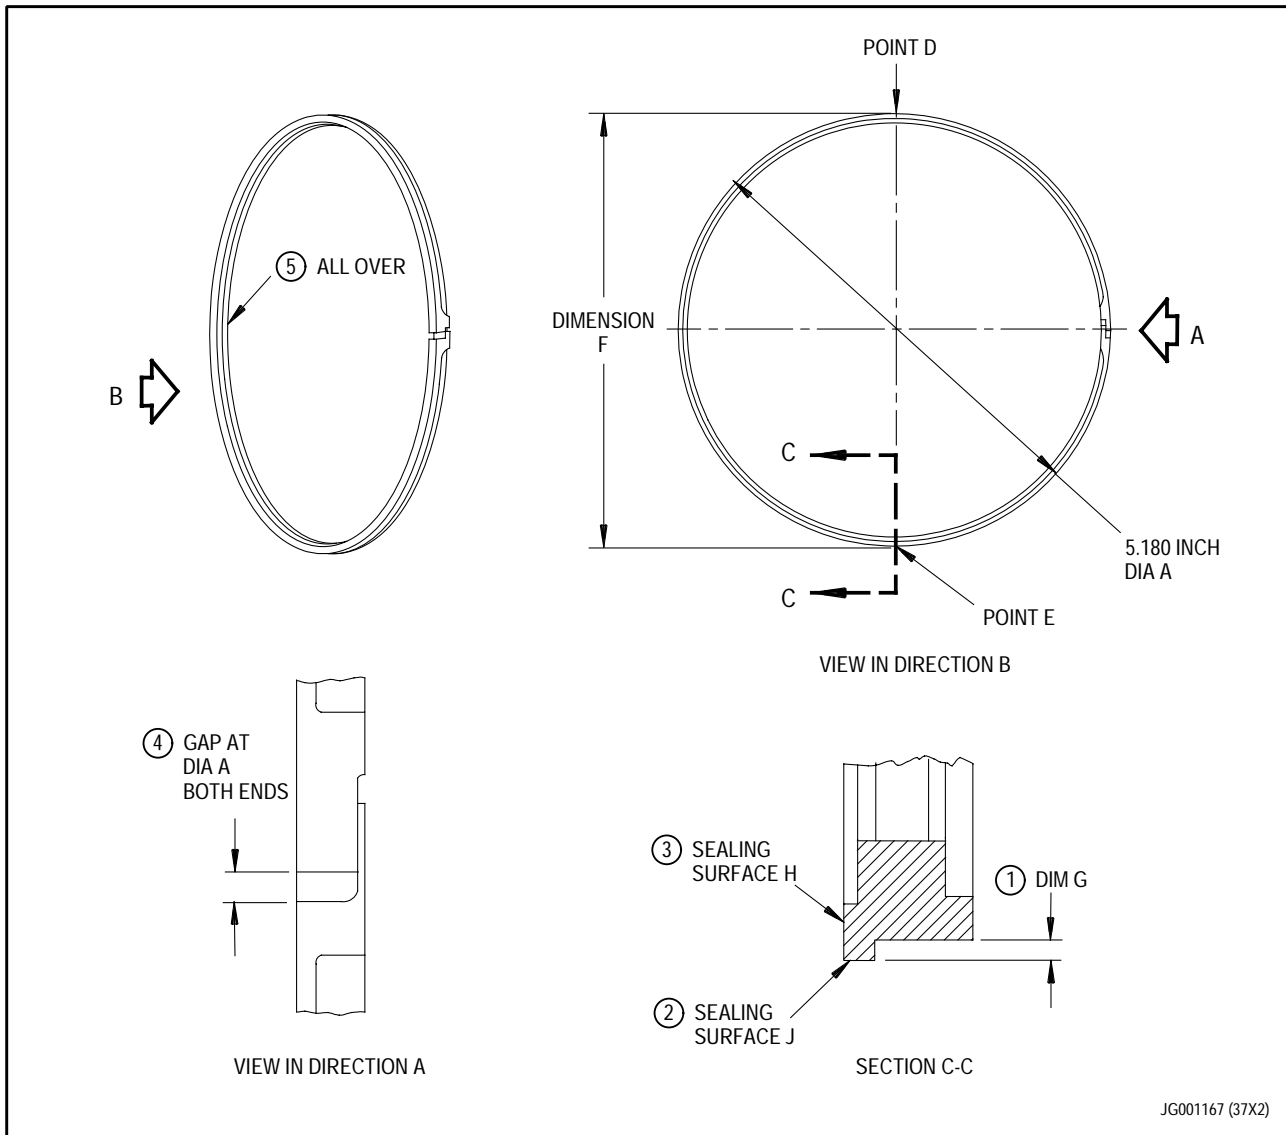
Metal Seal Ring (No. 2 Bearing Seal Sealing Ring) (PN 4001629) - Inspection
